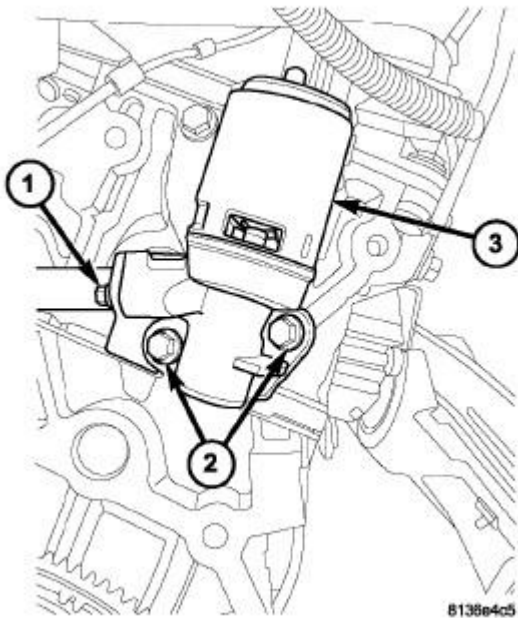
EGR Valve Mounting Bolts - 3.5L
